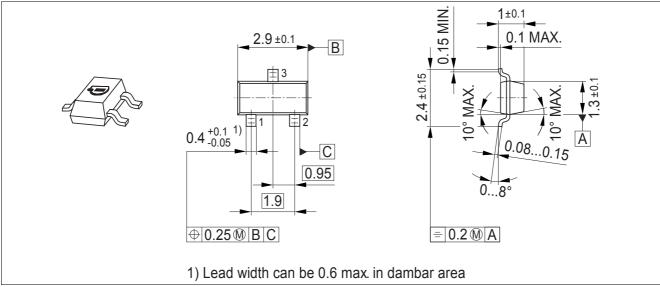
PG-SOT23-3-15 Package Outline (All Dimensions in mm)
